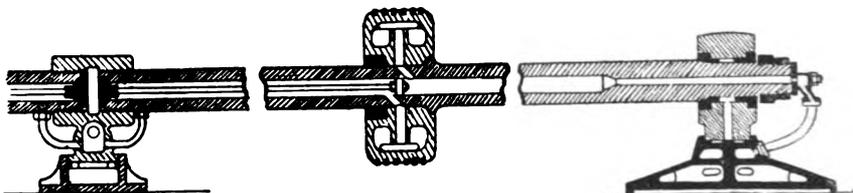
Nürnberg Piston, Rod, and Crossheads.
